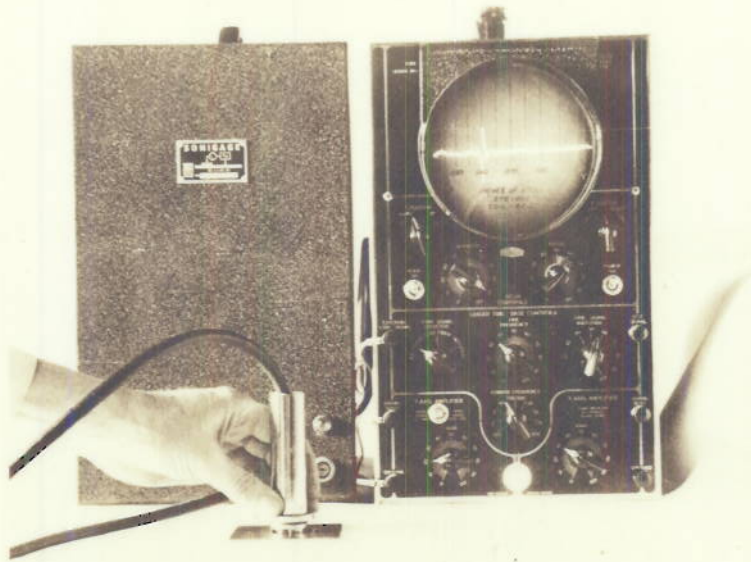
SONIGAGE MEASURING .062" SHEET STEEL
